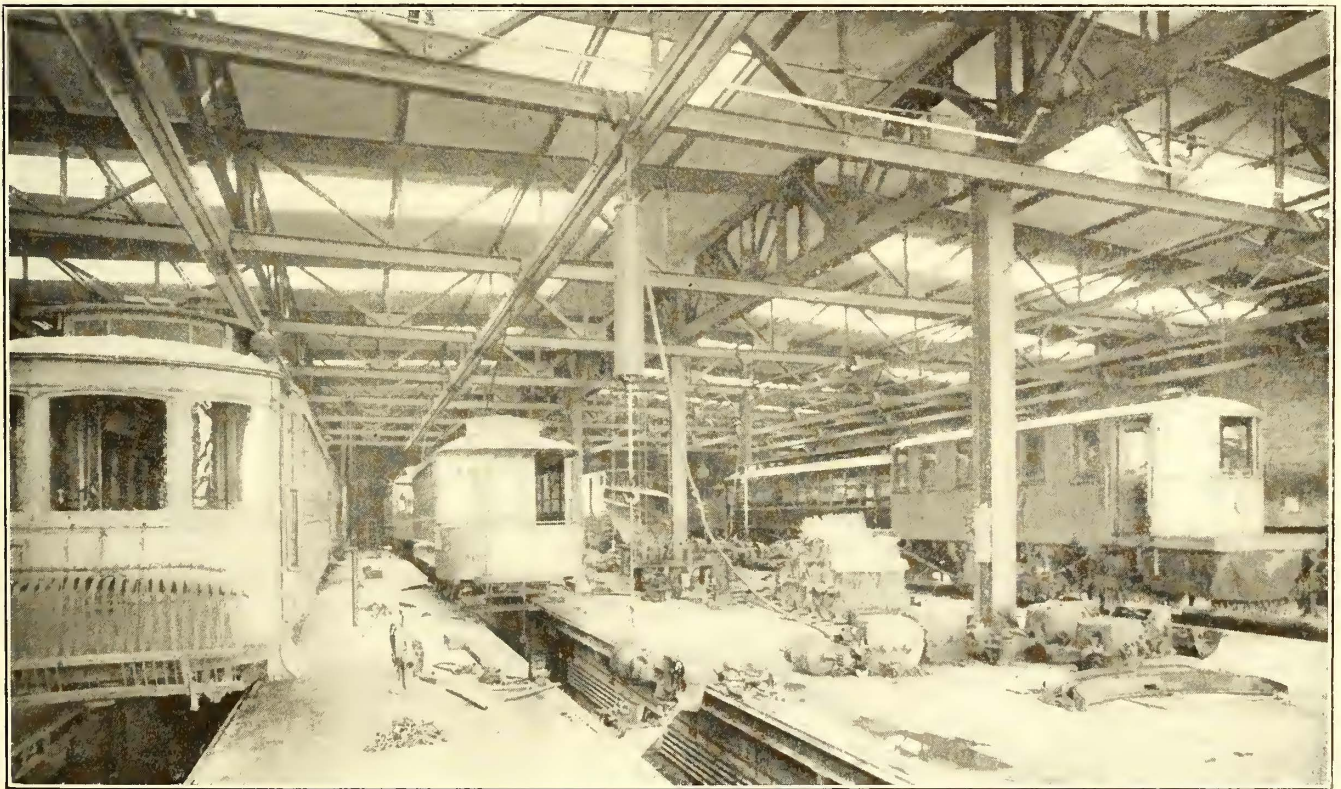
Syracuse Shops—View in Truck Shop, Showing the Storage Aisle Between the Light and Heavy Overhauling Sections
